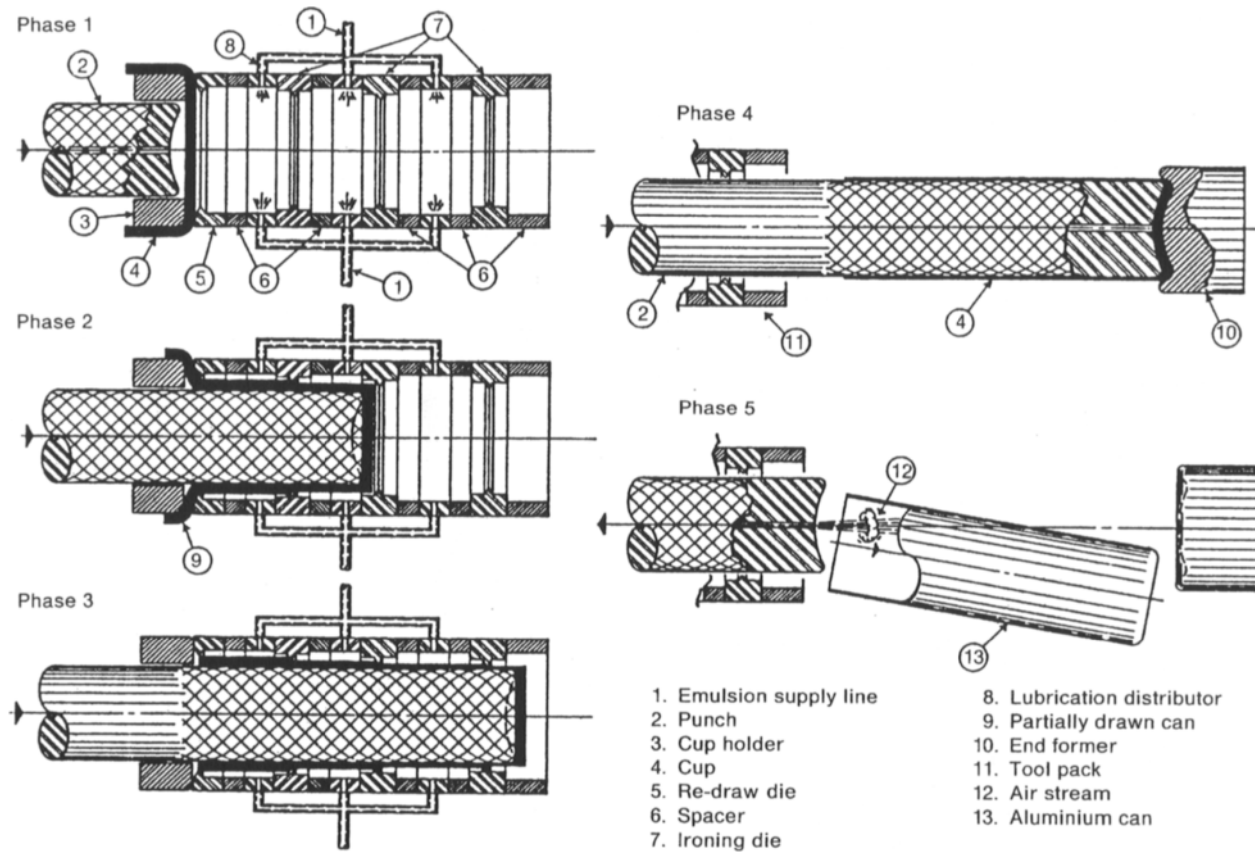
General arrangement of tooling and forming of beverage can in the bodymaker. (Reproduced courtesy of Texaco Inc.)
